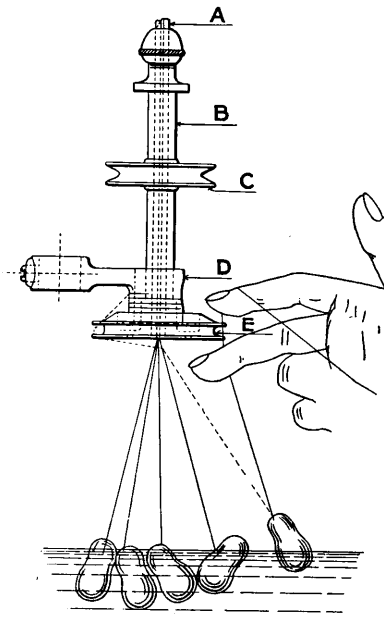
The Jette-bout, combining Five Cocoons in One Thread.
